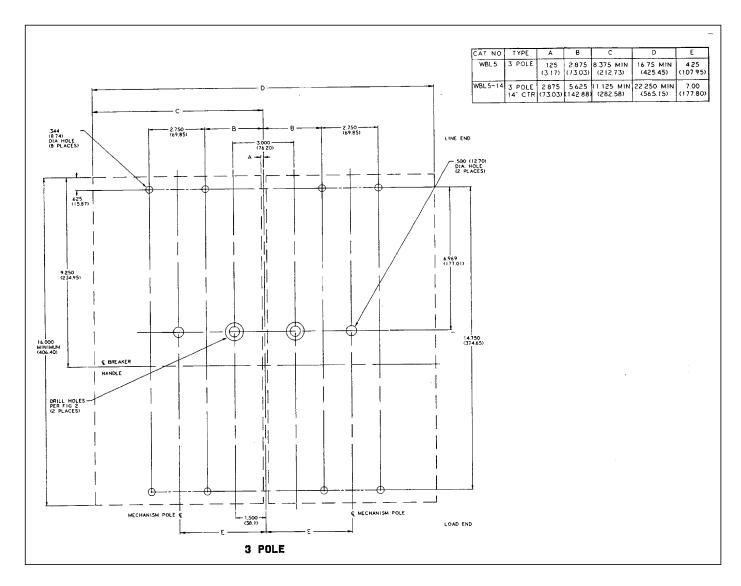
N-Frame 3-Pole Circuit Breaker Mounting Panel Hole Sizes, and Dimensions
